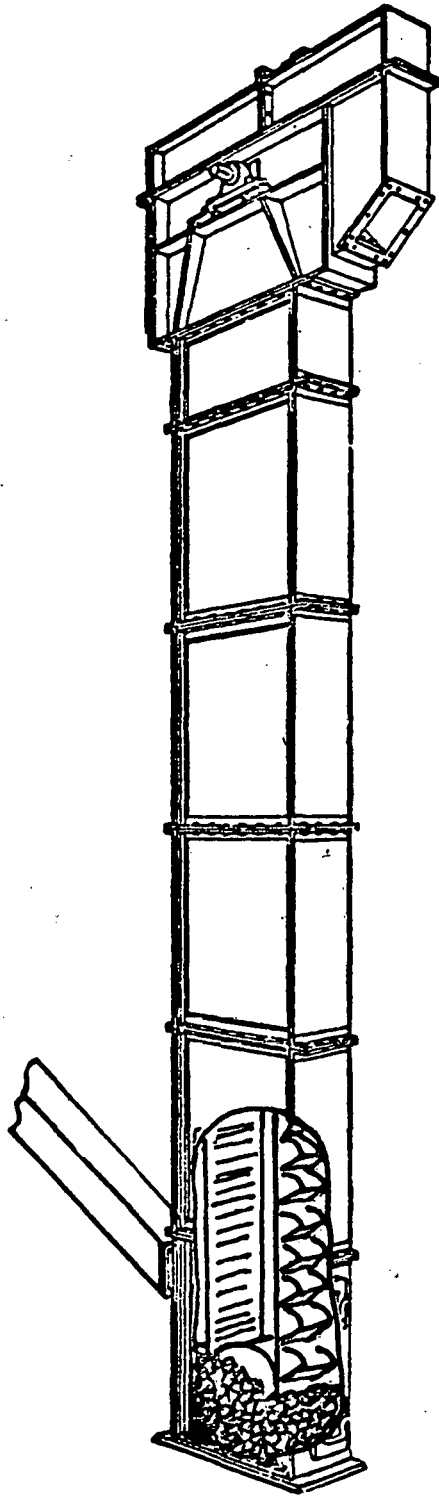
BUCKET ELEVATOR WITH BOTTOM OF HOUSING
